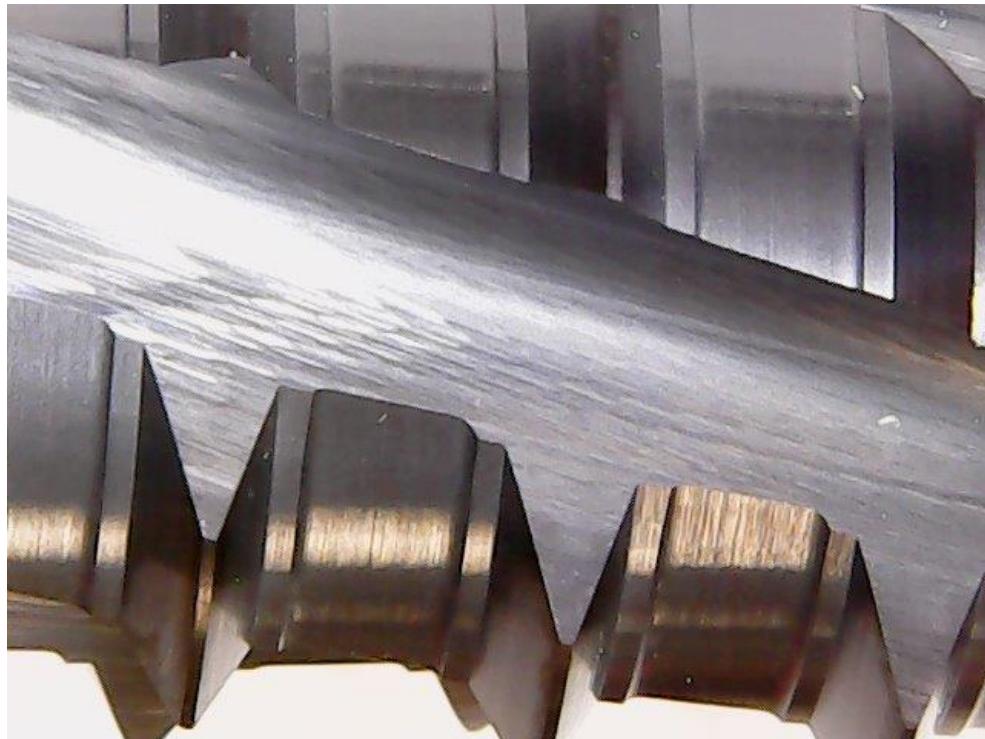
Cutting edges of solid thread milling tool TC620-M16-A1D-WB10TJ up-close.
